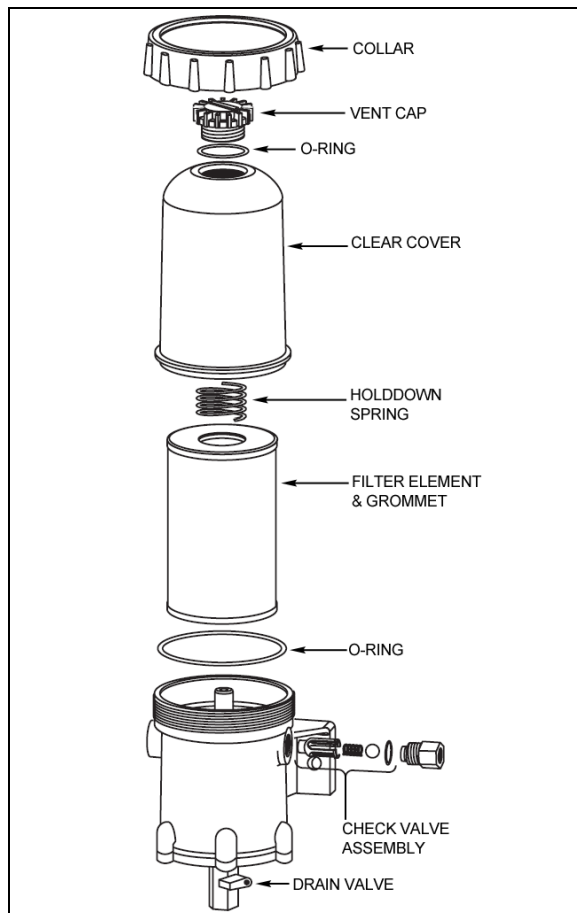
DAVCO FUEL PRO 382 EXPLODED VIEW 03034
